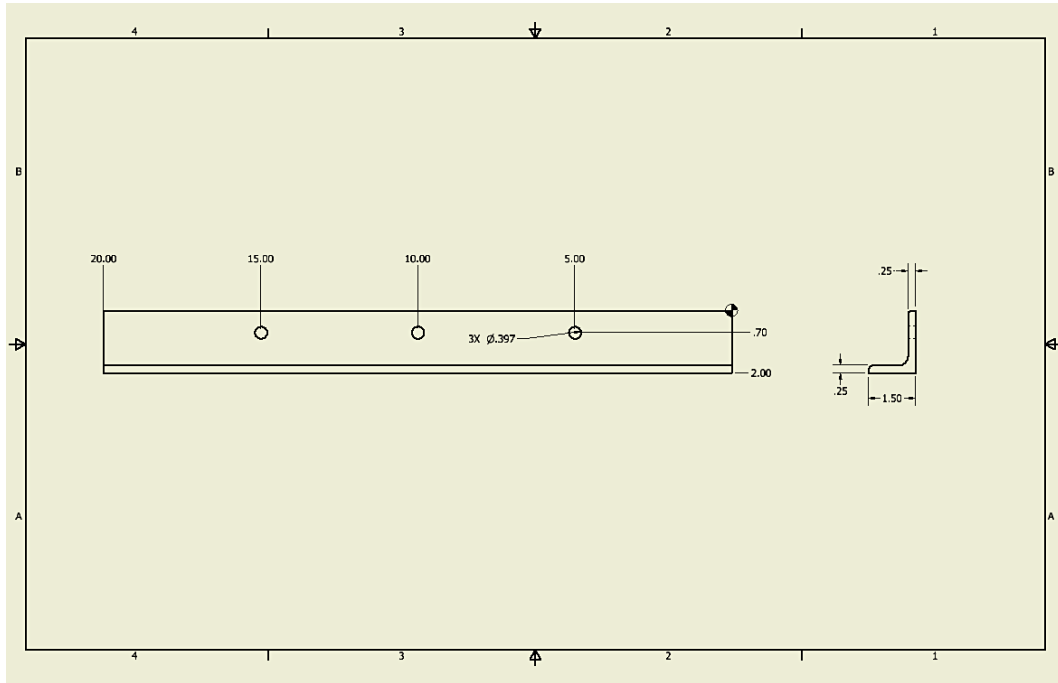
Dimensional drawing for L-bracket for shock absorbers
